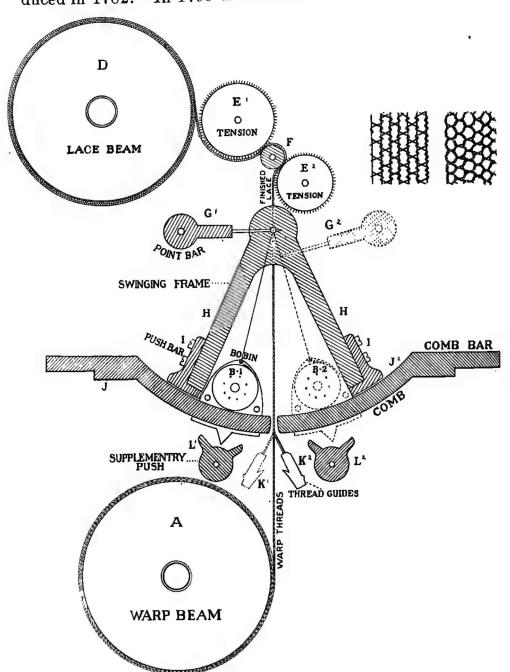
SECTION OF LACE MACHINE ONE-THIRD FULL SIZE.
